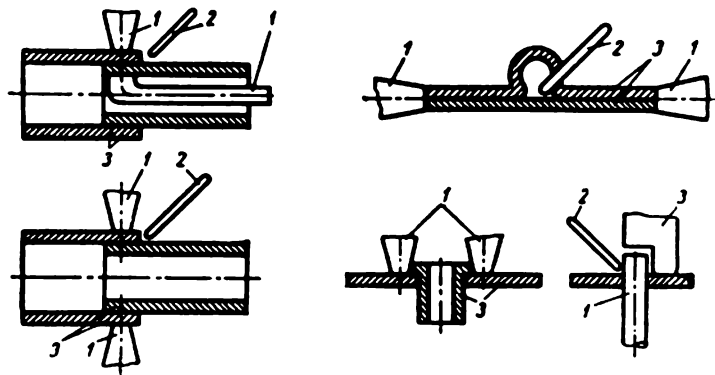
Position of electrodes (1), of the parts to be soldered (3), and the solder (2) in electric-resistance soldering
